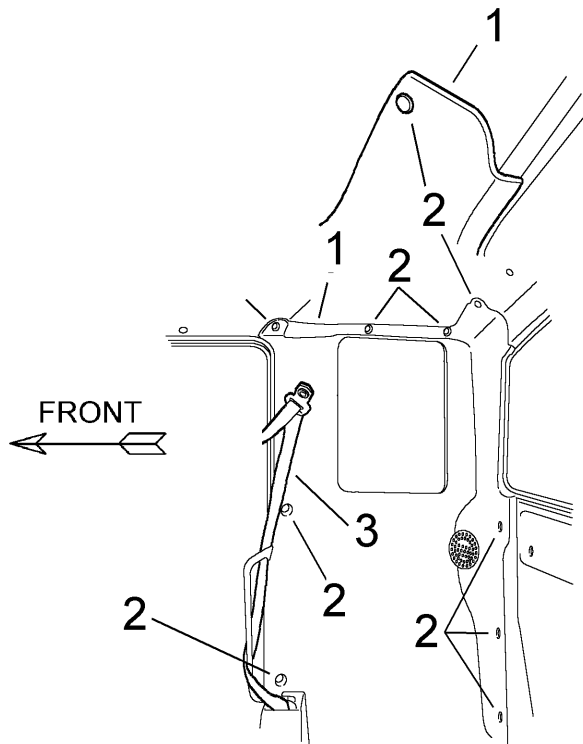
Side and Corner Trim Panel, Passenger Side Shown
